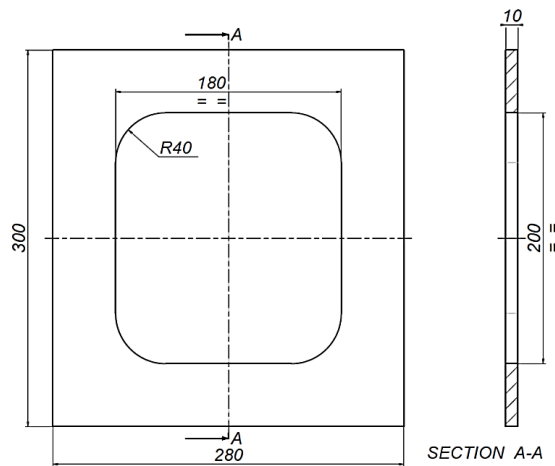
4: external dimensions (left) and transversal middle section of the blankholder (right).
